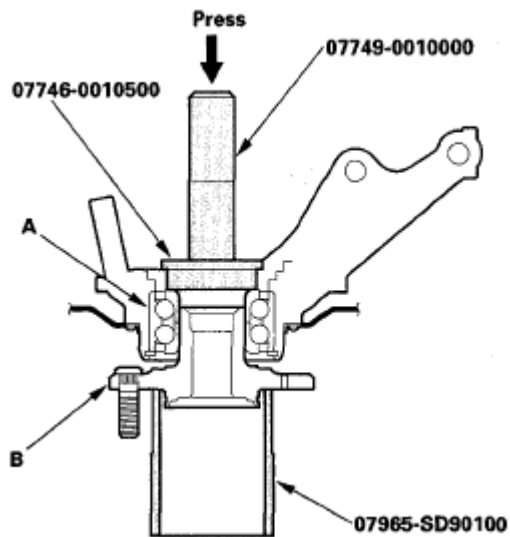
Pressing Wheel Bearing Onto Hub Using Driver
